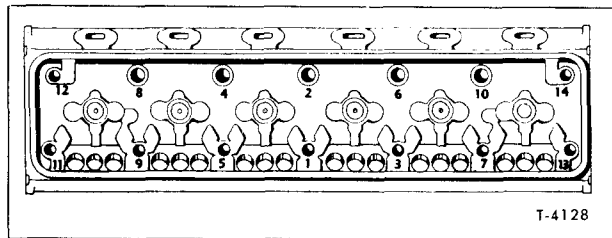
Cylinder Head Bolt Tightening Sequence on In-Line Engine (6-71 N/NE)
